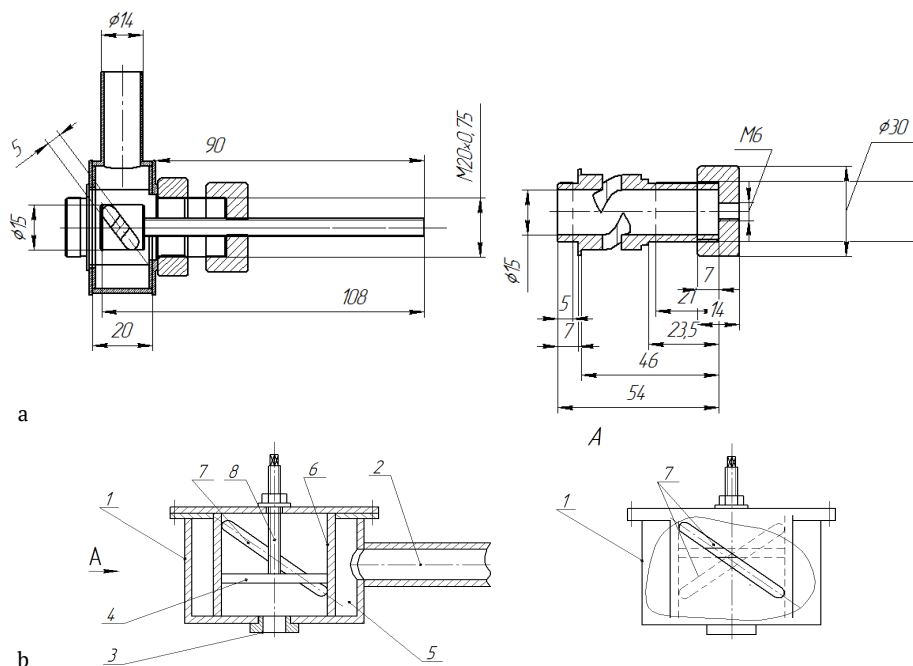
Nozzle with two inclined supply channels: a – structures, b – drawing
